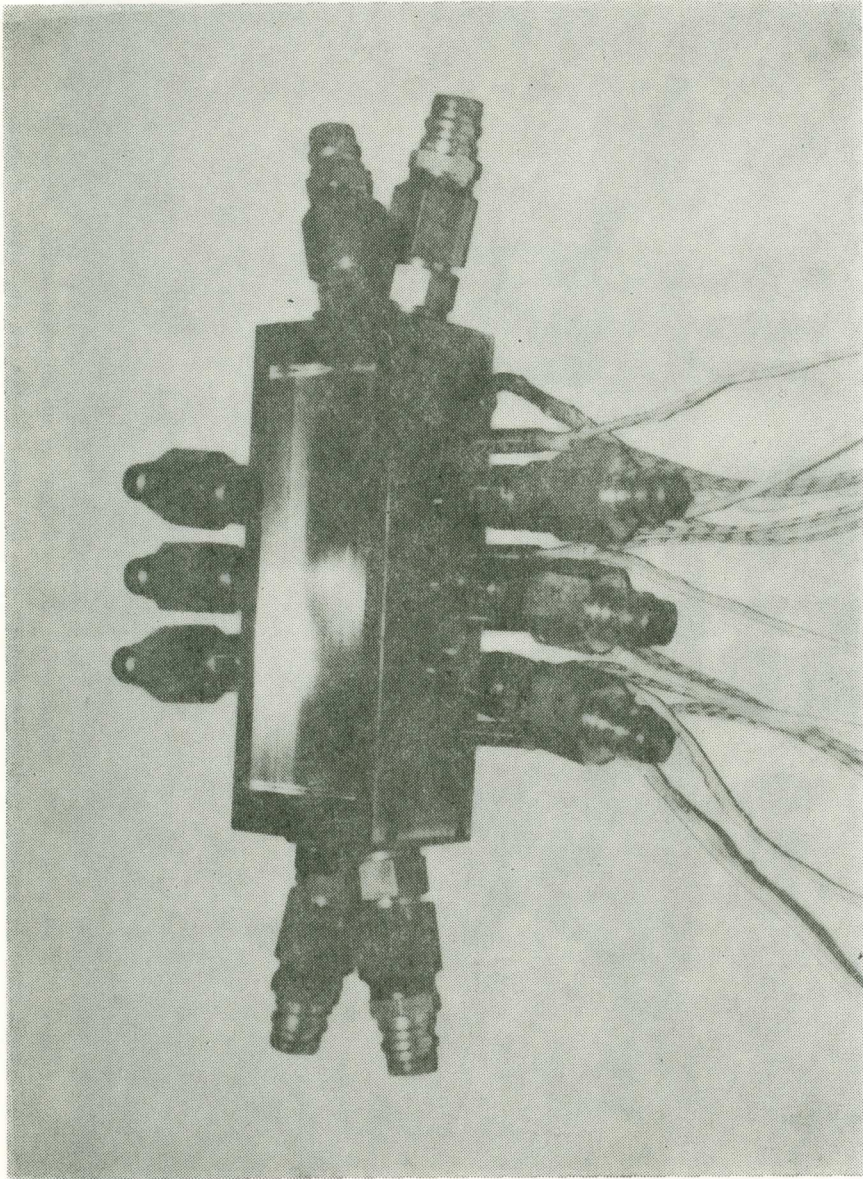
Photograph of assembled bottom part of the match die mold with side plates. Top part is identical except without the side plates.
